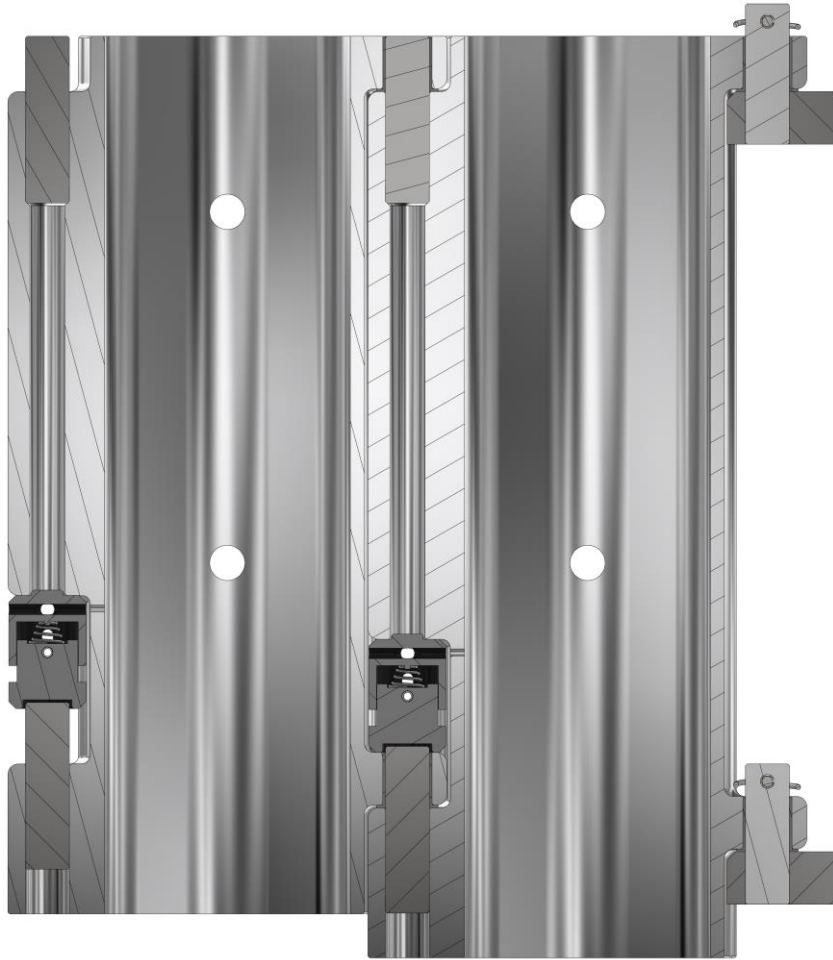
JibFlex module connection (section view): Cross-sectional view of two adjacent JibFlex modules positioned for assembly, showing the hinge interface with bushing, hinge pin engagement, and the lock bracket mechanism used to secure the joint.
